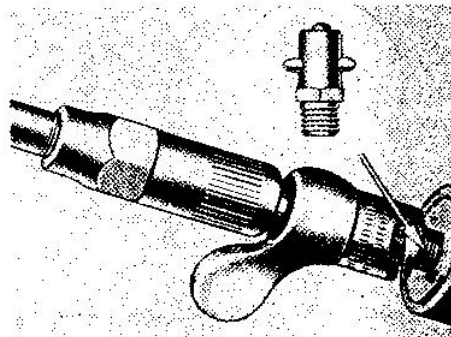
The 6594 Gun used on 5329 Adaptor.
